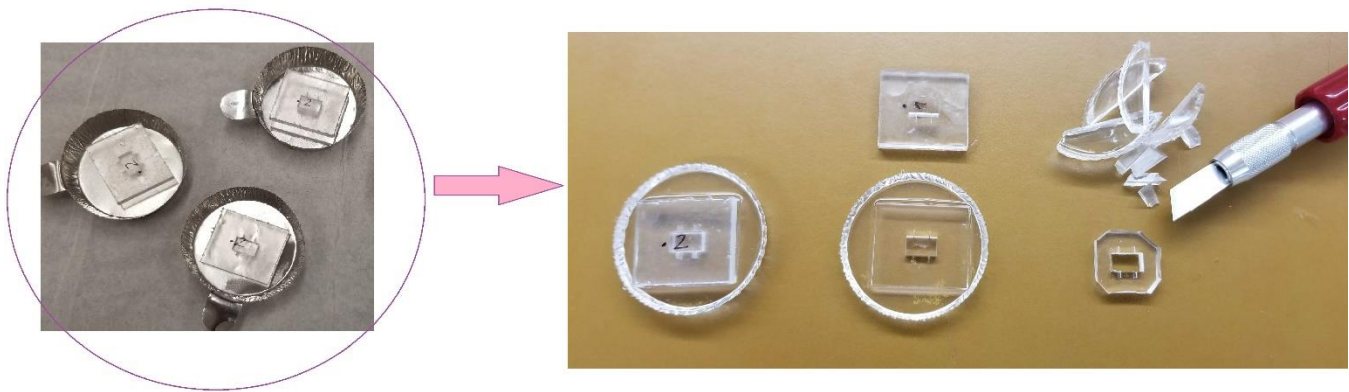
The process of removing the 3D prints and cutting the extra edges from the PDMS mold.
